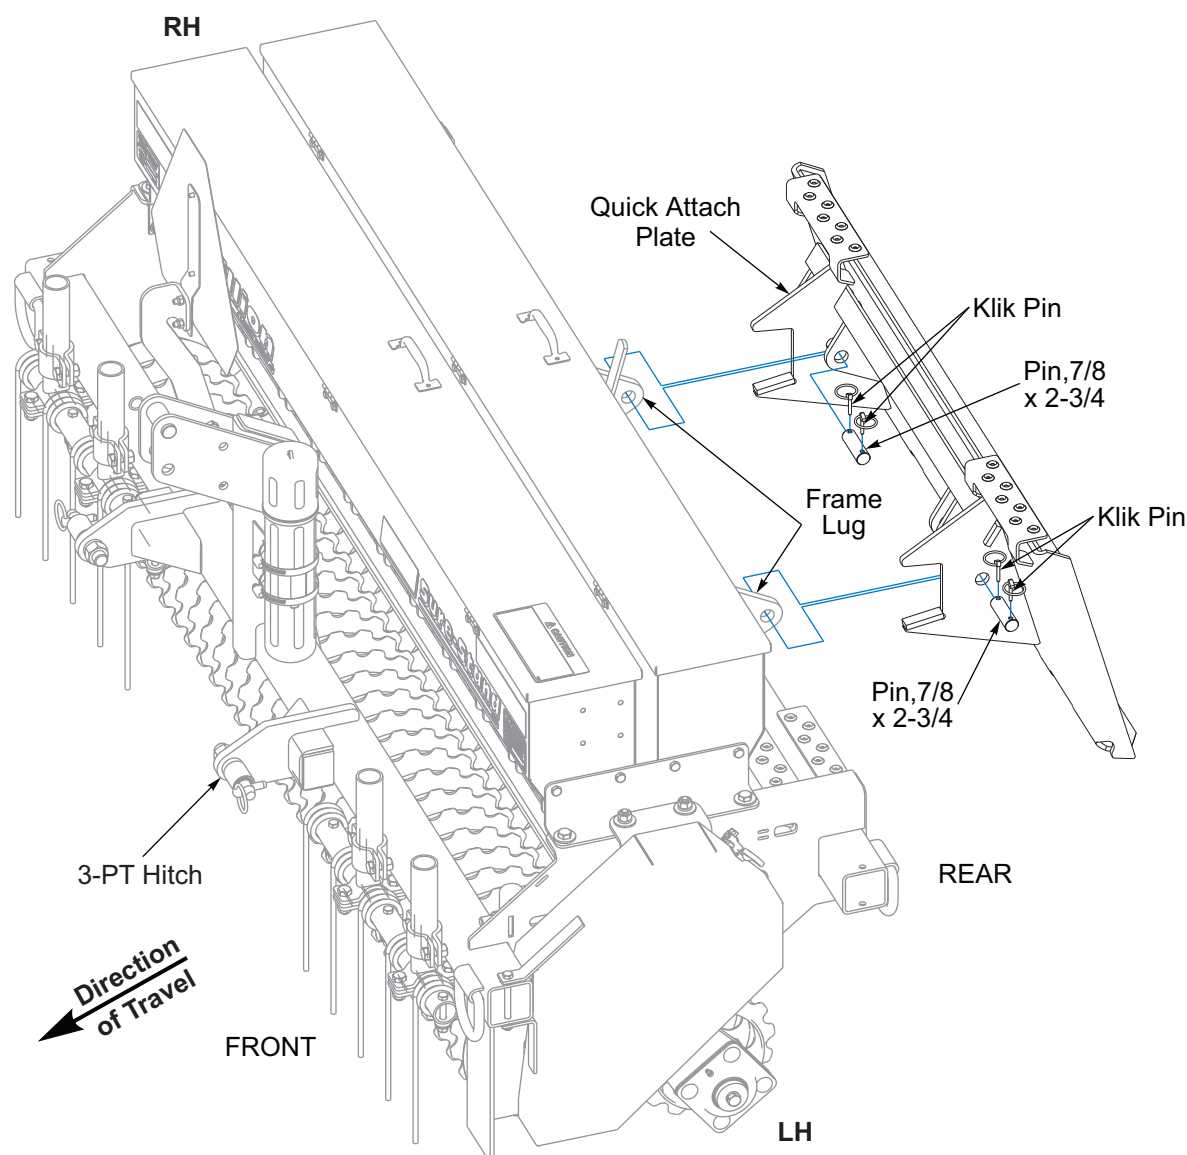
Skid Steer Seeder Quick Attach Plate
